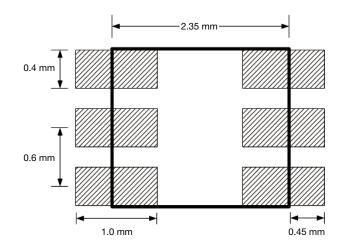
VEML6070 OPLGA PCB Layout Footprint
